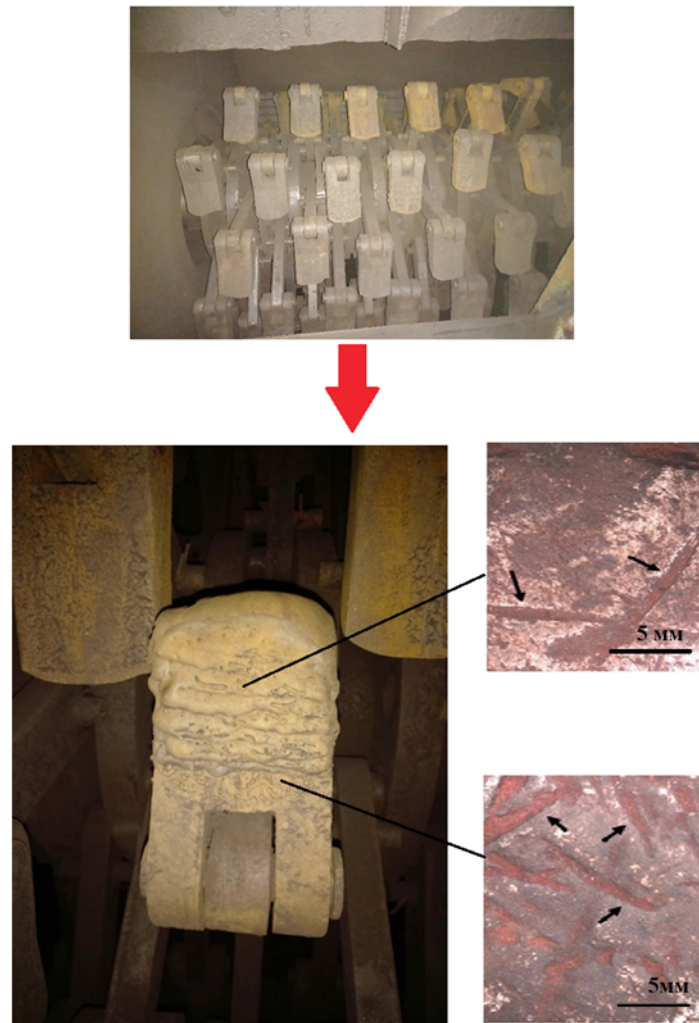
Inspection of welded beaters after 466 hours of testing
